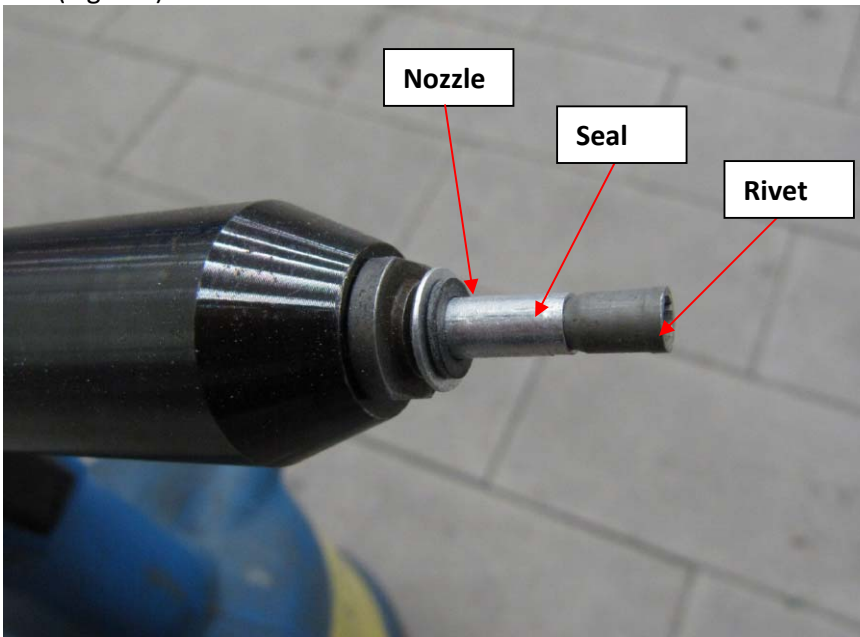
Avdel installation device Genesis nG3 with Monobolt Rivet 2774 with installed seal
